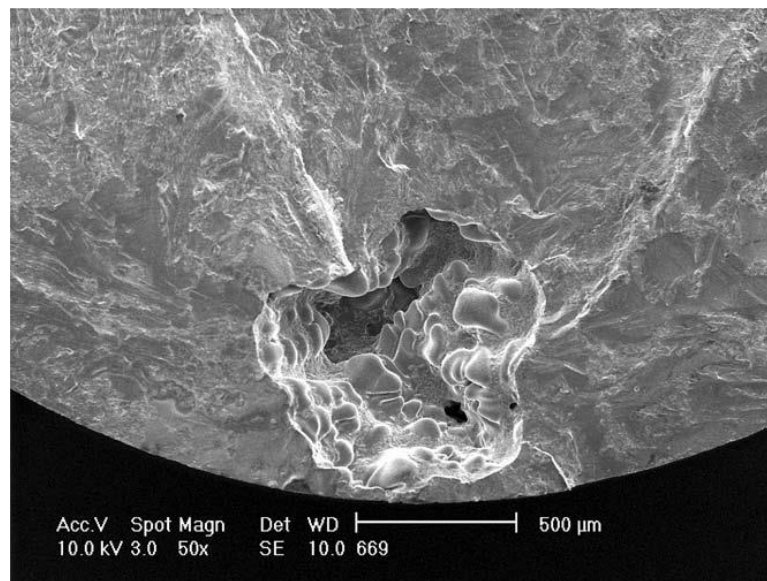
Fatigue crack initiating pore near surface of a 319 aluminum alloy casting [16].
